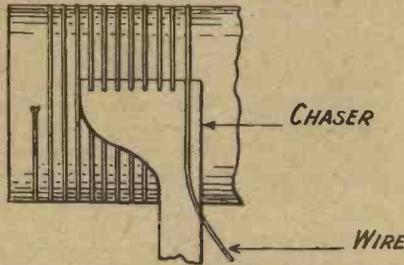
The employment of the chaser ensures even spacing throughout the length of the coil.
